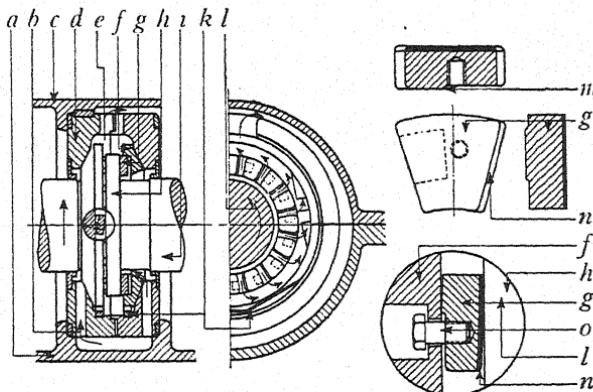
Single-Collar Thrust Bearing with Movable Pads for Thrusts in Both Directions on a Horizontal High-Speed Shaft
